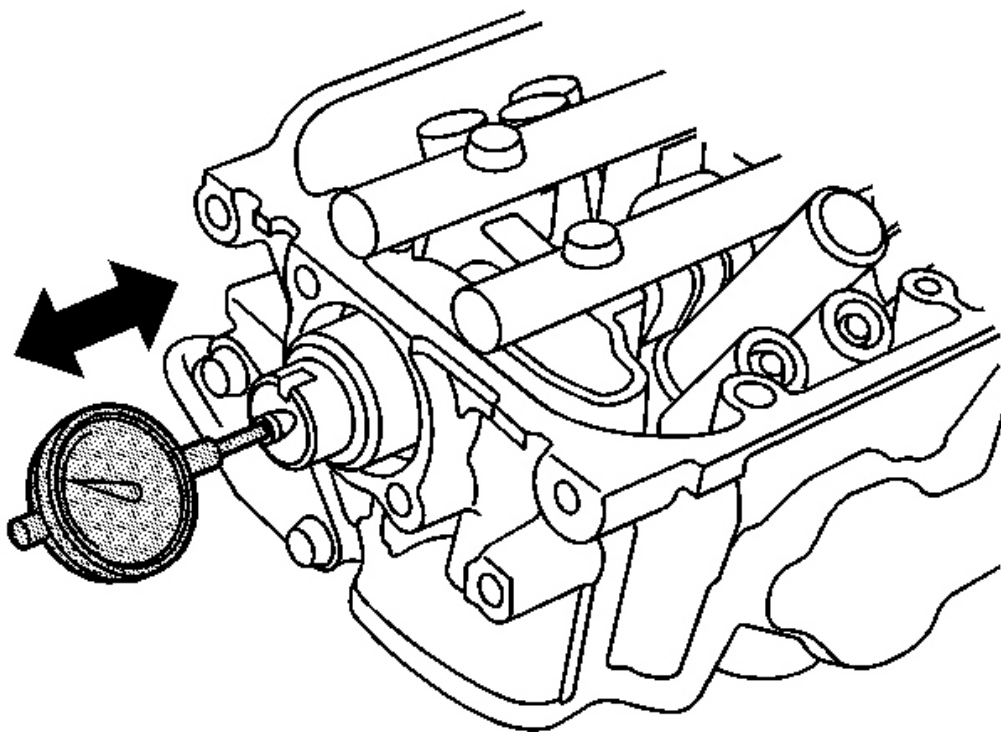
View Of Camshaft Pushing It Toward The Rear Of The Cylinder Head
